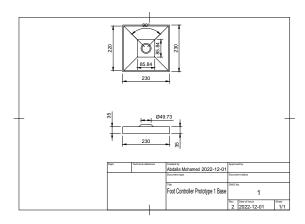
Foot Controller Prototype 1 Base Technical Drawing
